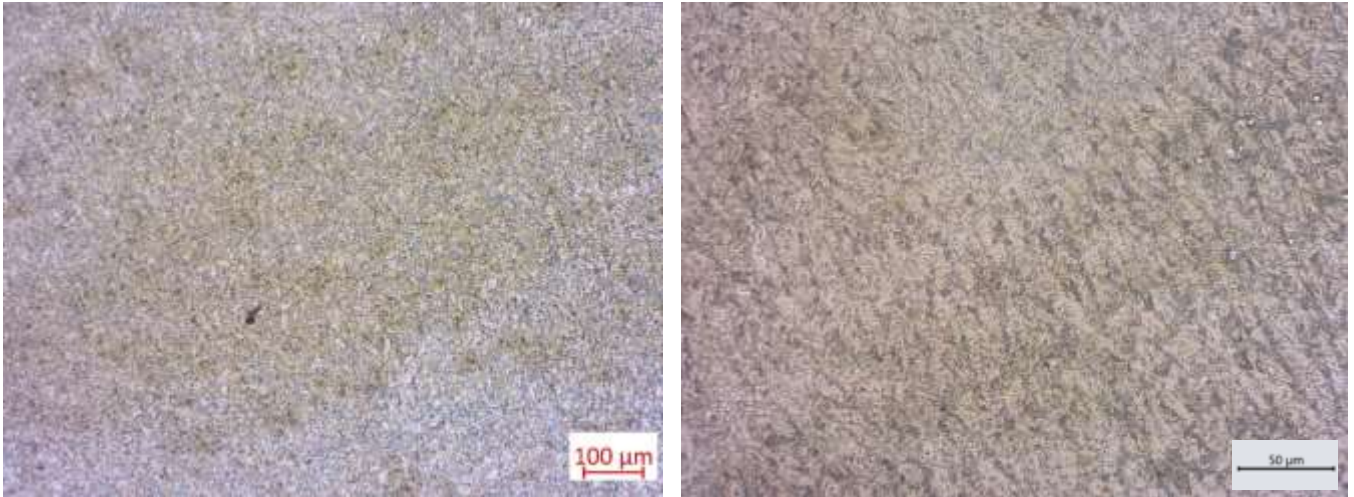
Optical pictures of annealed MMA welded sample fusion zone FZ
